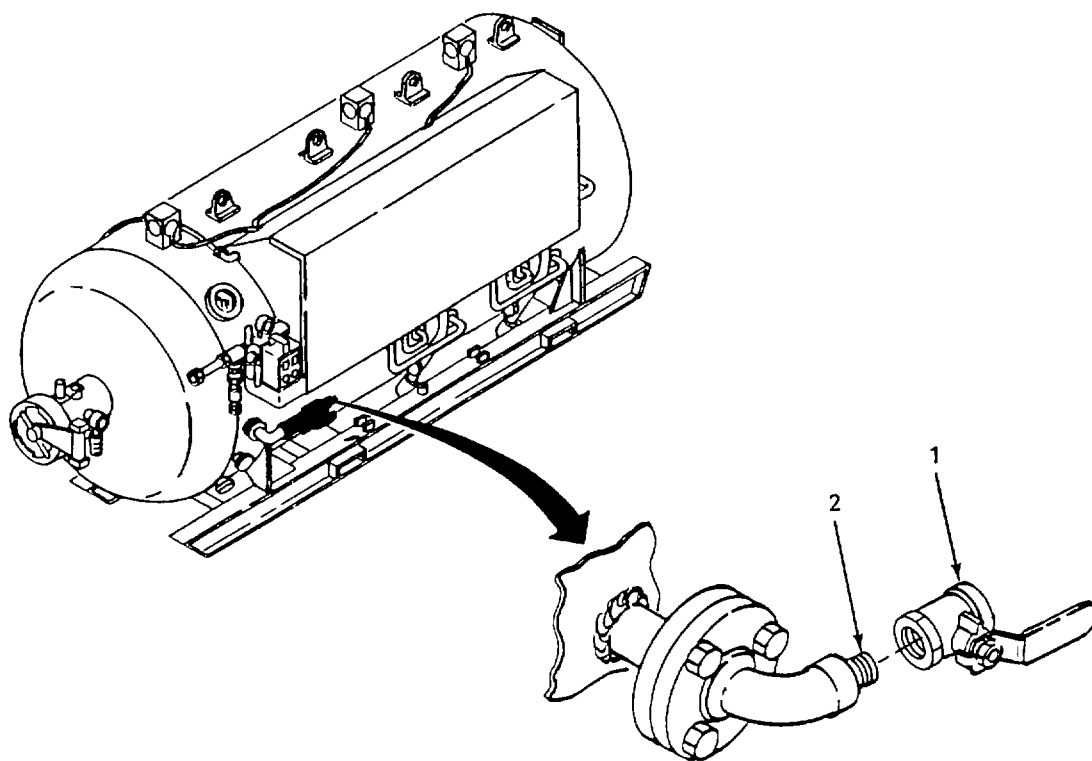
Ball Valve 3/4 Inch, Replace.
